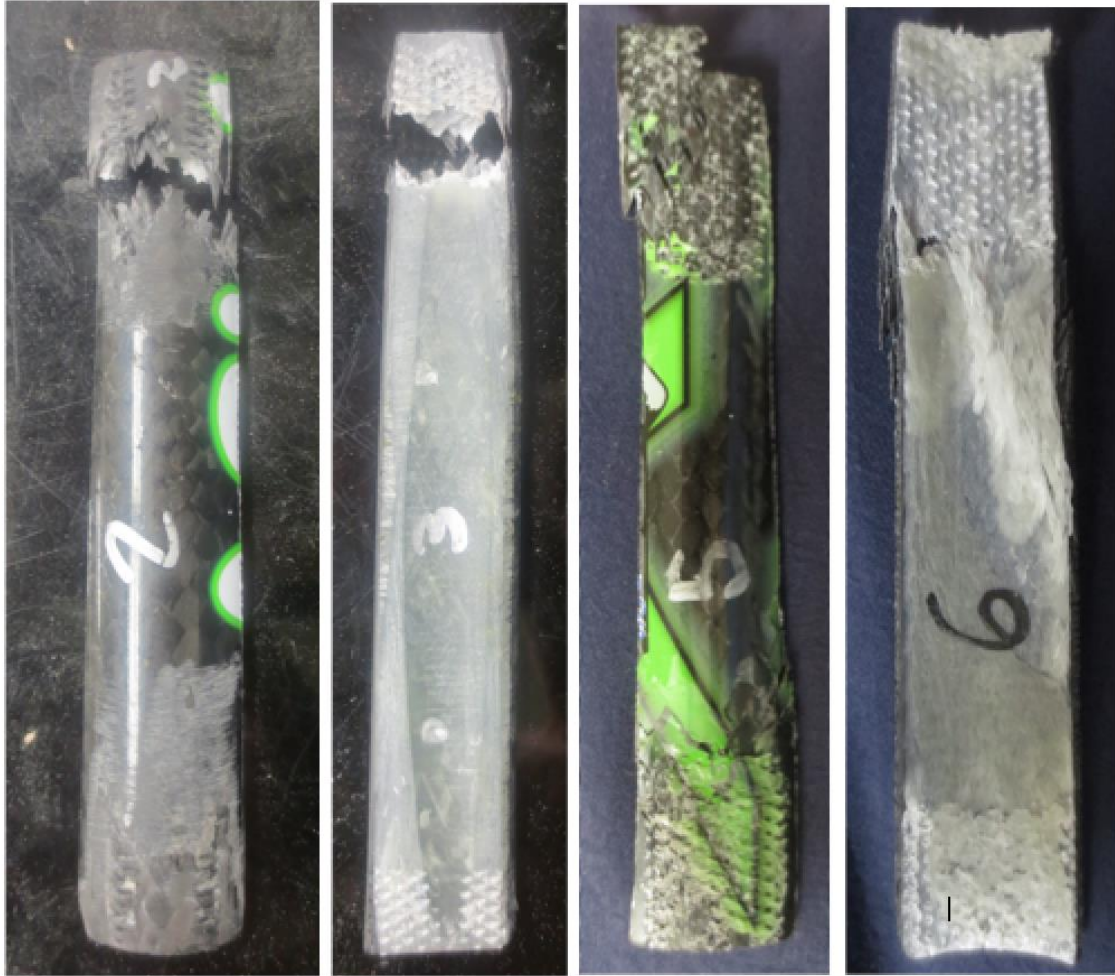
Fracture failure in specimens 2, 3, 5, and 6 during tensile test [2].
